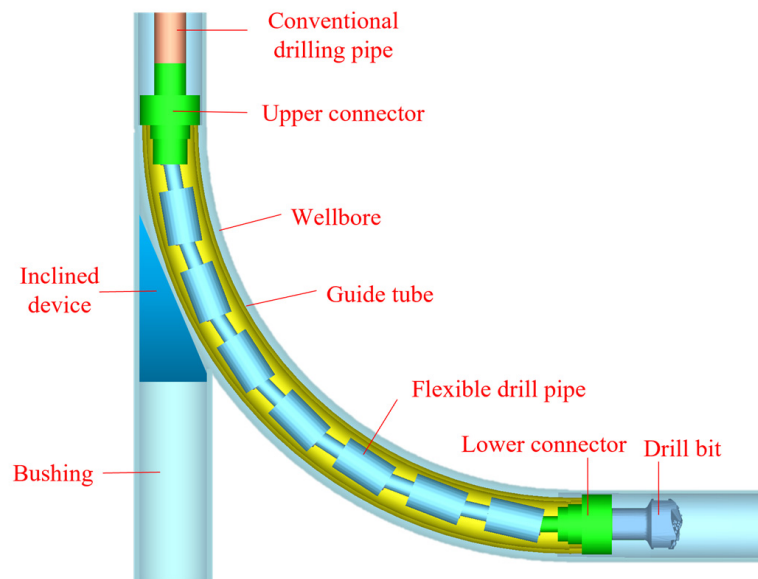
Schematic diagram of ultra-short-radius flexible drilling tool.
